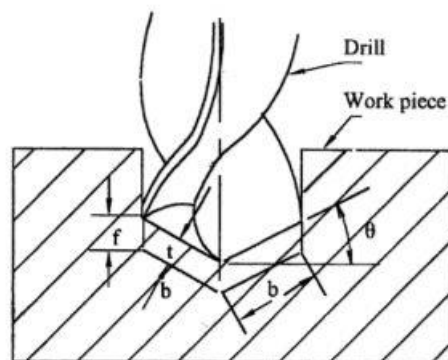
Drilling process with f - feed per revolution of the drill, t - uncut chip thickness, b - drill radius and θ - point angle of the drill [6].
